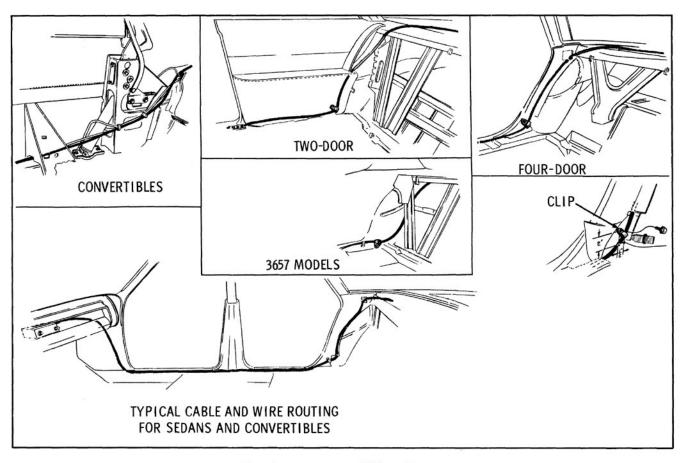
Electric Antenna Cable and Wiring Routing
